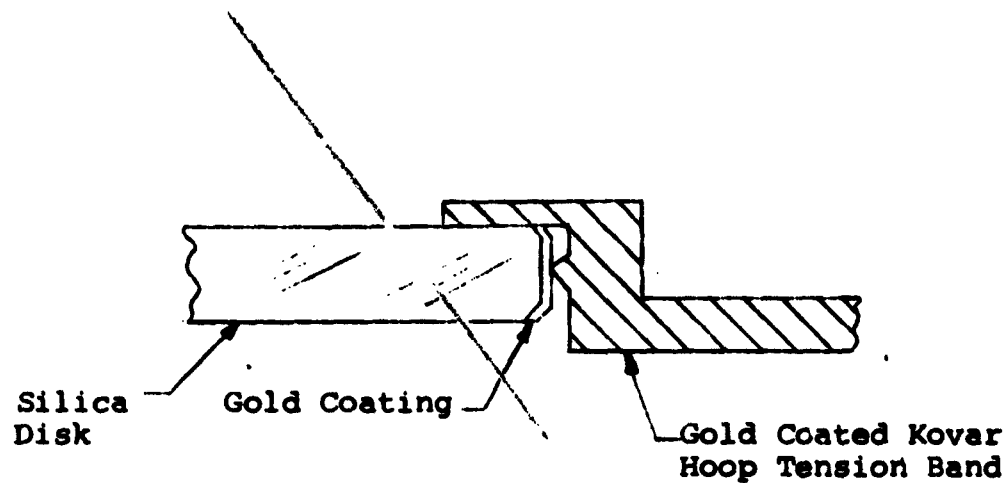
Gasket Type Static Seal Glazing Assembly
